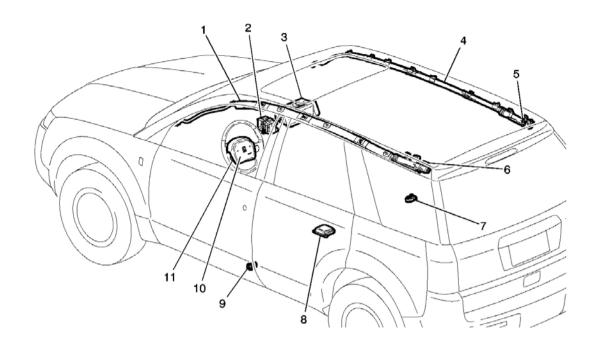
SIR Components View Courtesy of GENERAL MOTORS CORP.
